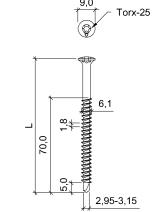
BS 6.1 Screw forfixing in metal sheets
